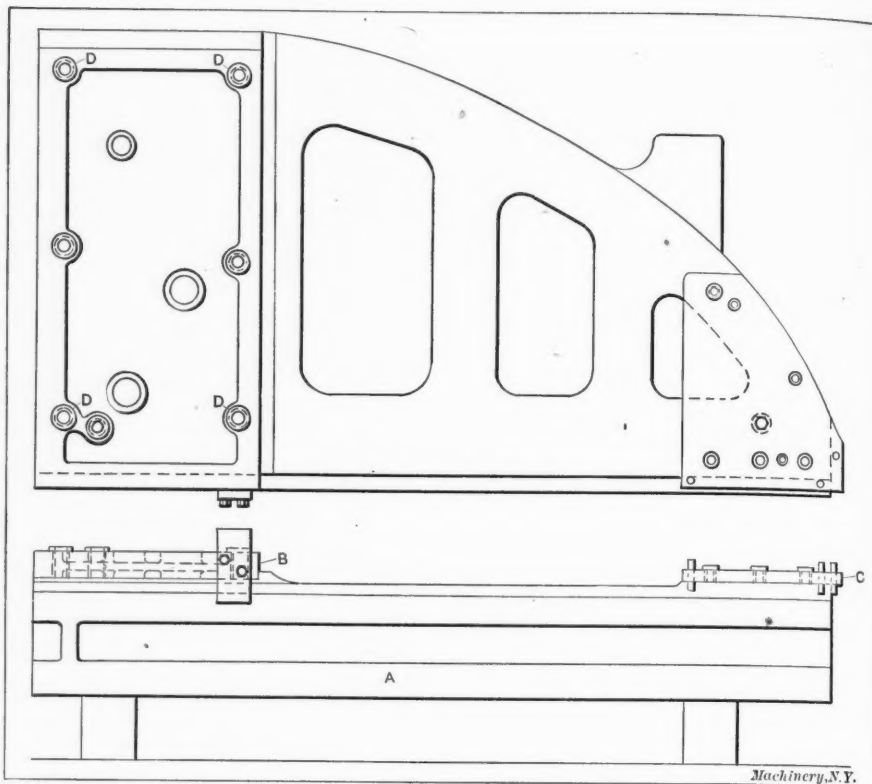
Front Housing with Jigs in Position for Drilling Clamping Bolt Holes. Same Jigs are used for Similar Operations on the Back Housing
